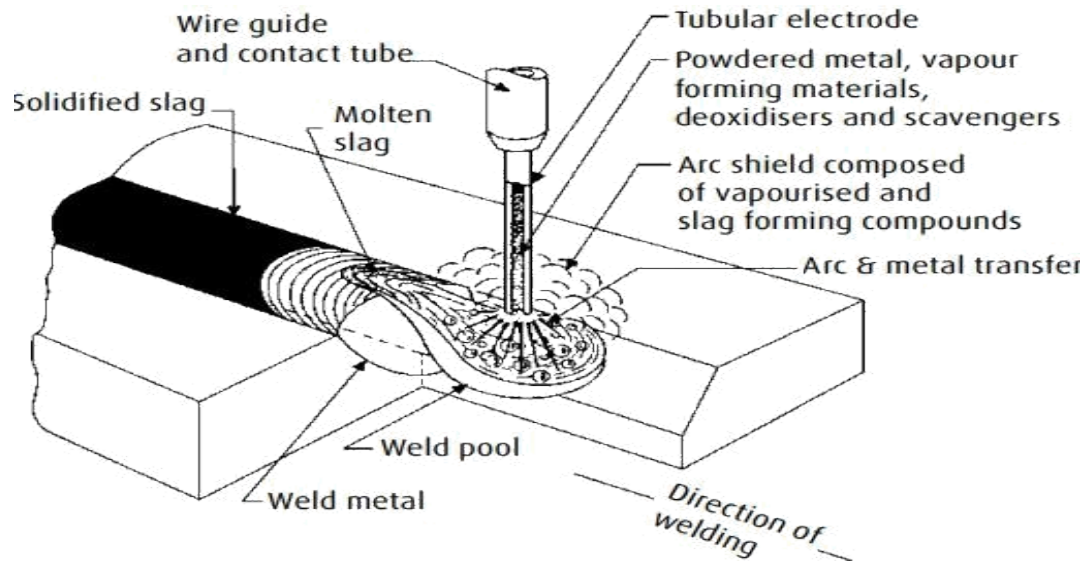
Flux core welding (Courtesy www.weldingis.com)
